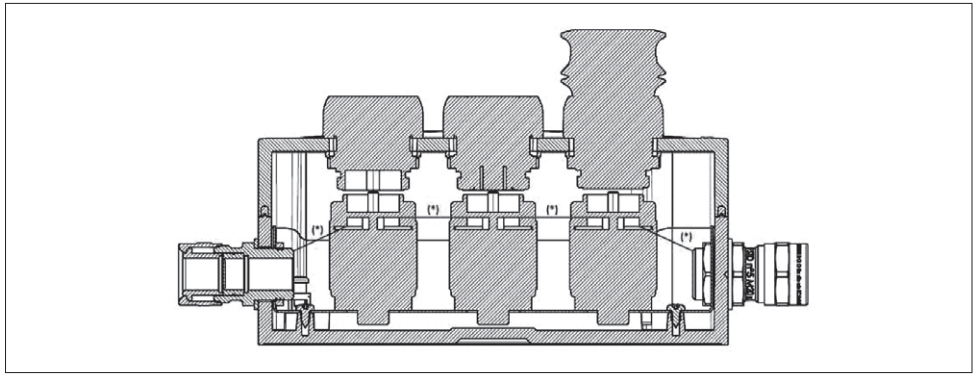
Details of clearance distances and mounting of metallic cable gland
